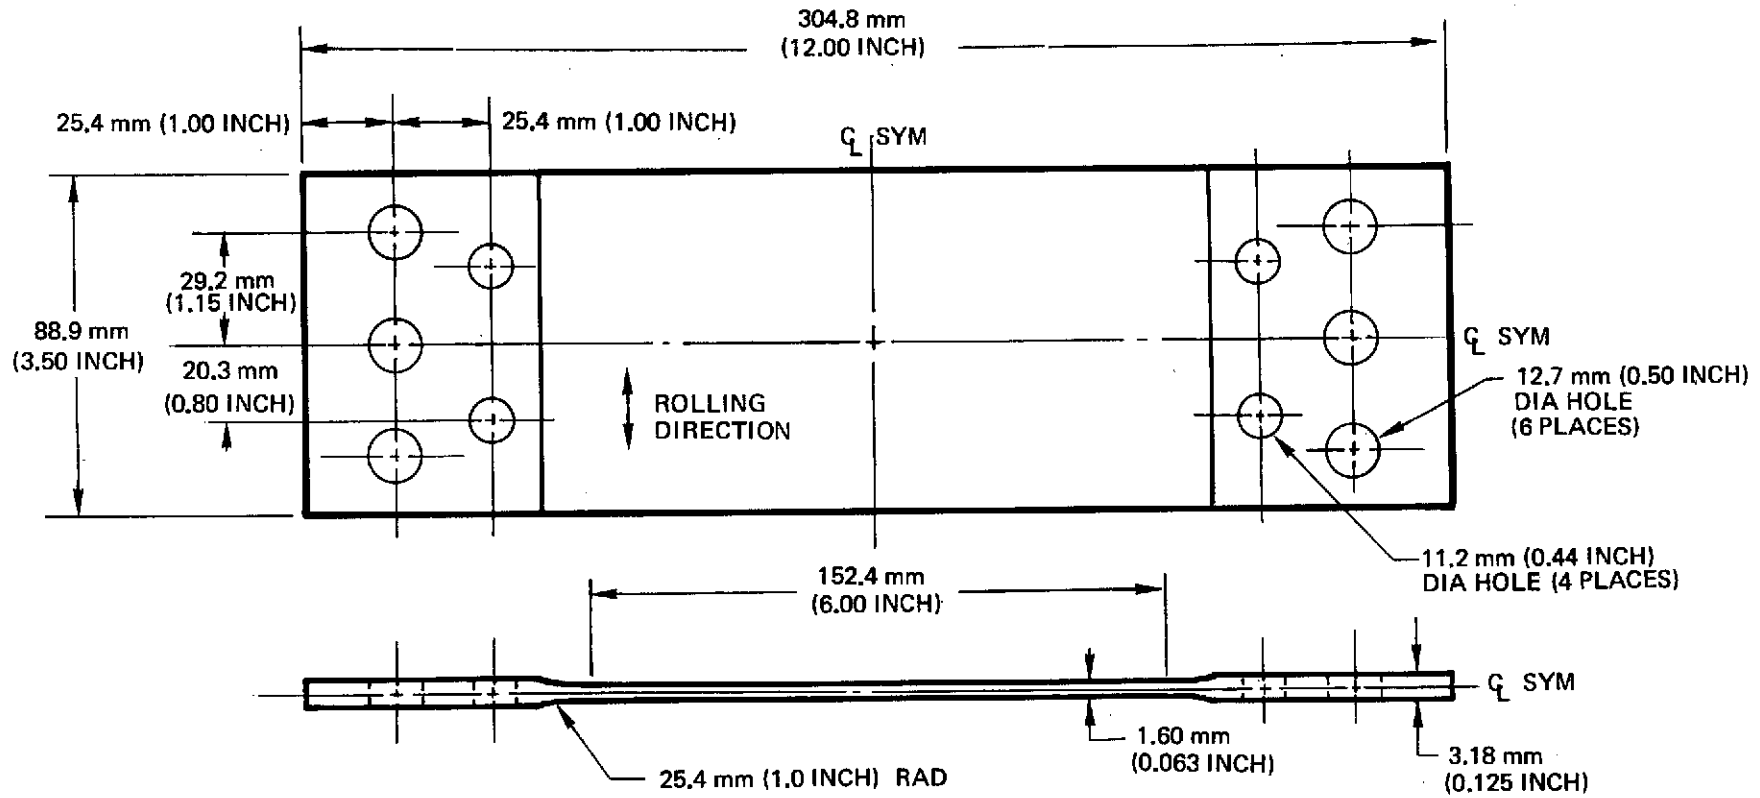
1.60 mm (0.063 INCH) THICK 2219-T87 ALUMINUM ALLOY BASE METAL SPECIMEN
